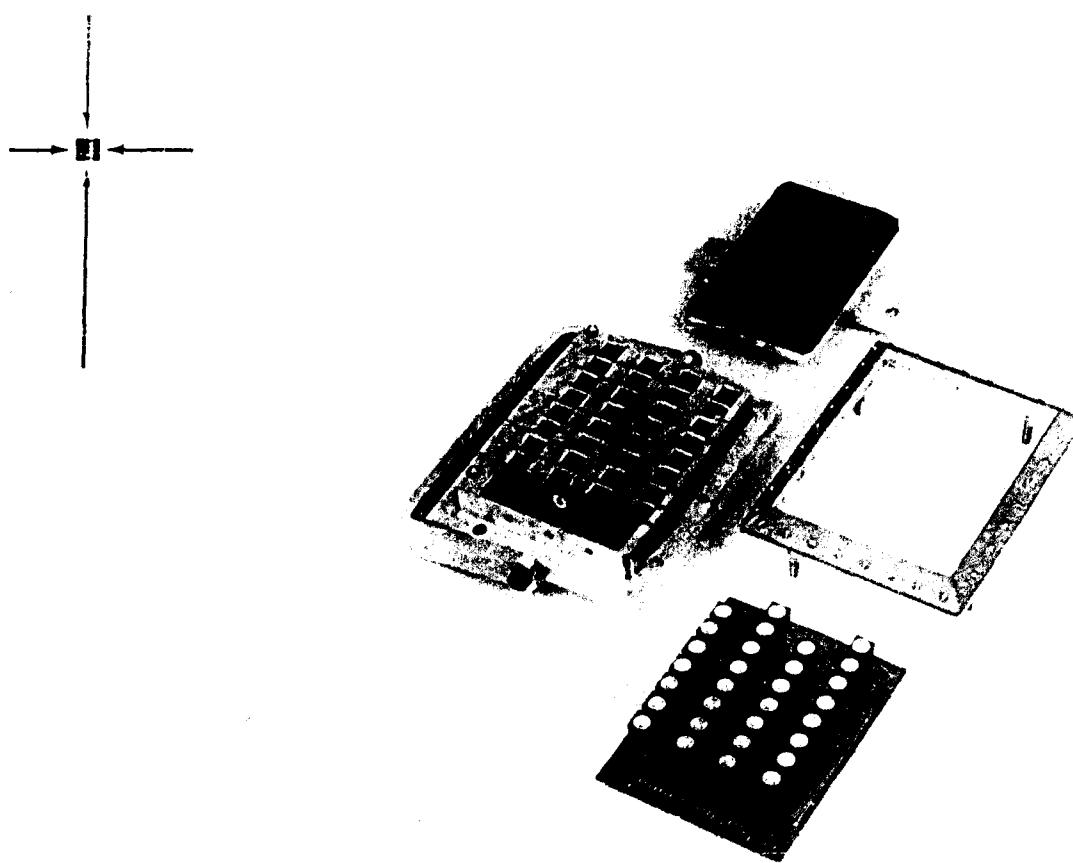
Dip-Soldering Fixture and Assembled Board
